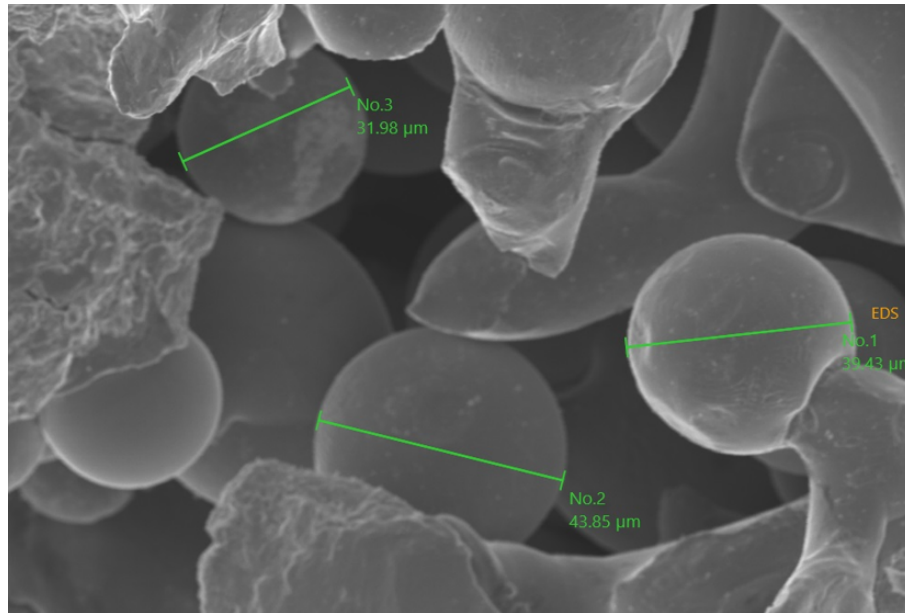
Close-up into a fracture surface of a void of an as-built specimen printed at 65° with un-melted powder particles inside
